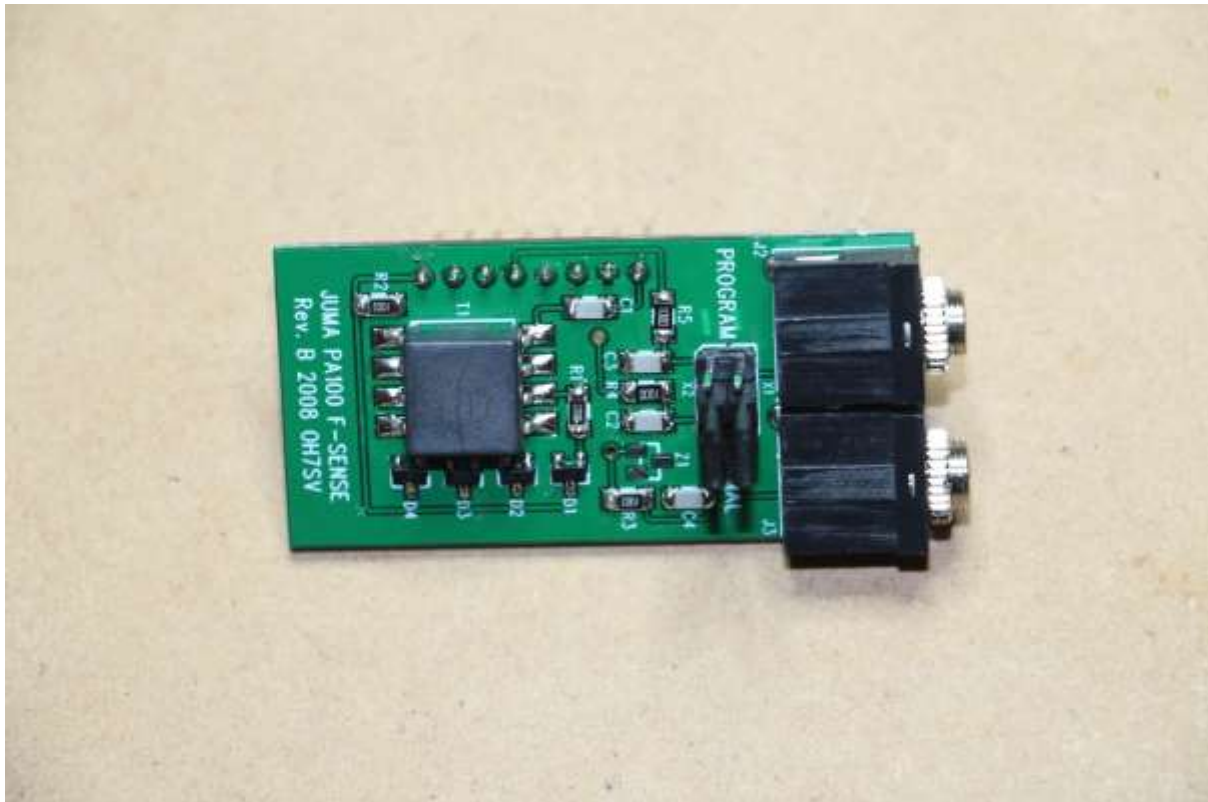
Frequency Sense Board with all components on top of PCB fitted.
